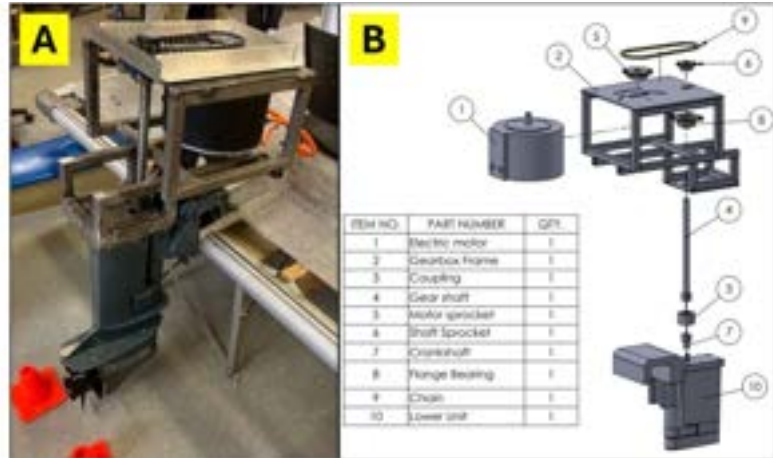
Produced (A) and CAD (B) model of motor mount and lower unit.
